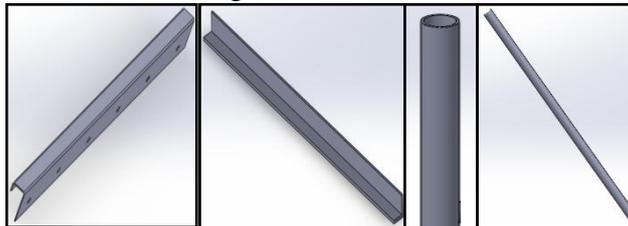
Band Plate, L-angle, Big pipe weldment, Small pipe weldment
